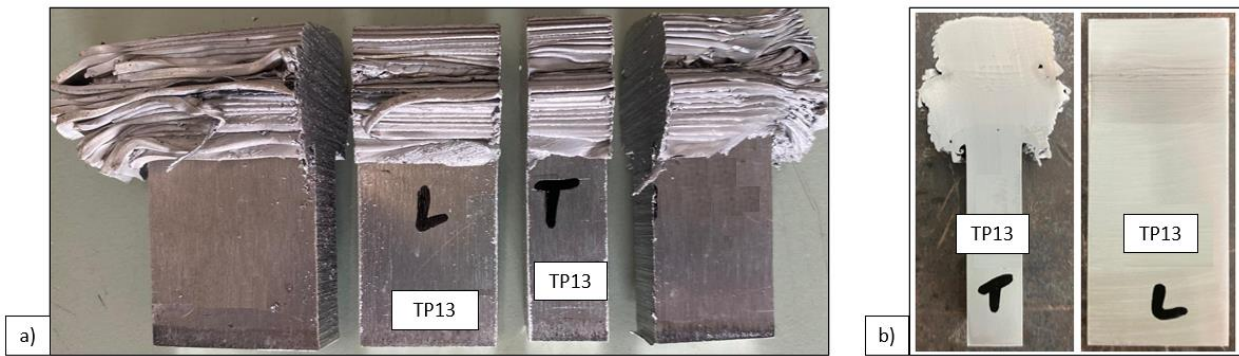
Representation of the cuts made in the test: a) before machining; b) after machining and polishing.
